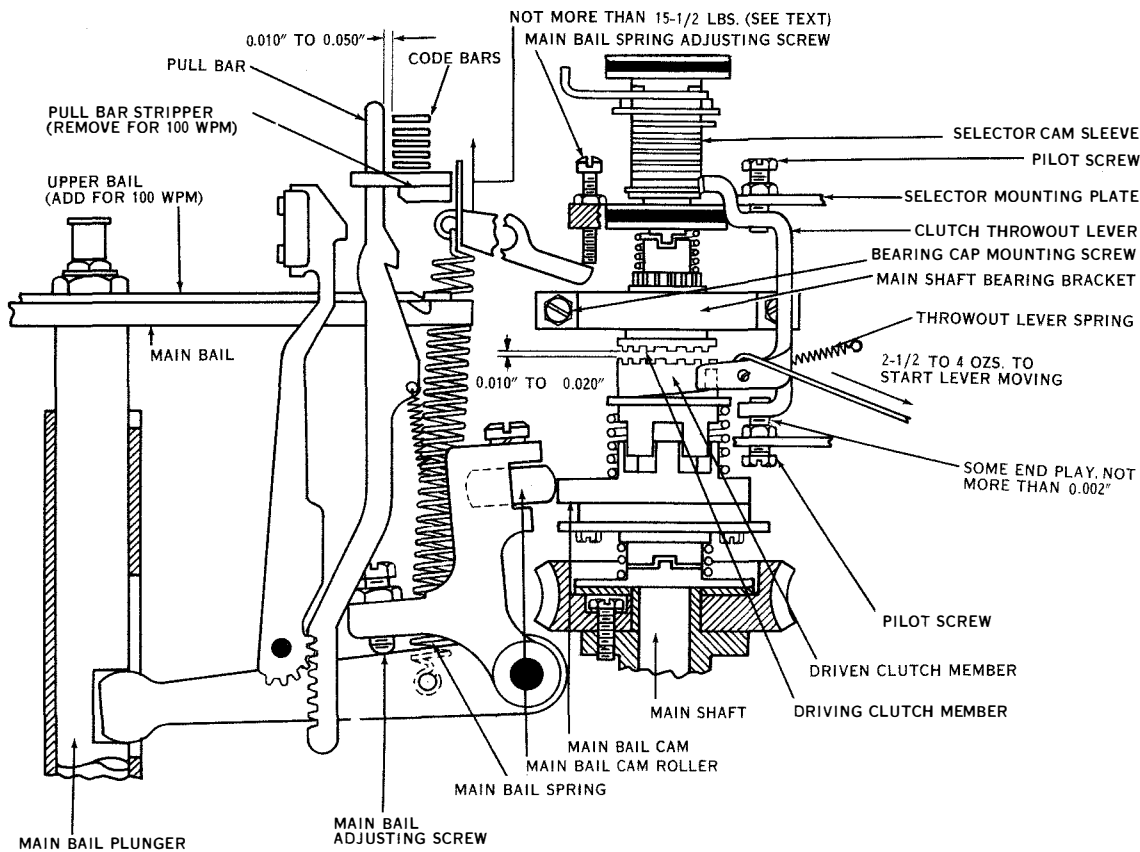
Main Shaft Clutch Throwout Lever, Clutch Spring Tension and Main Bail
